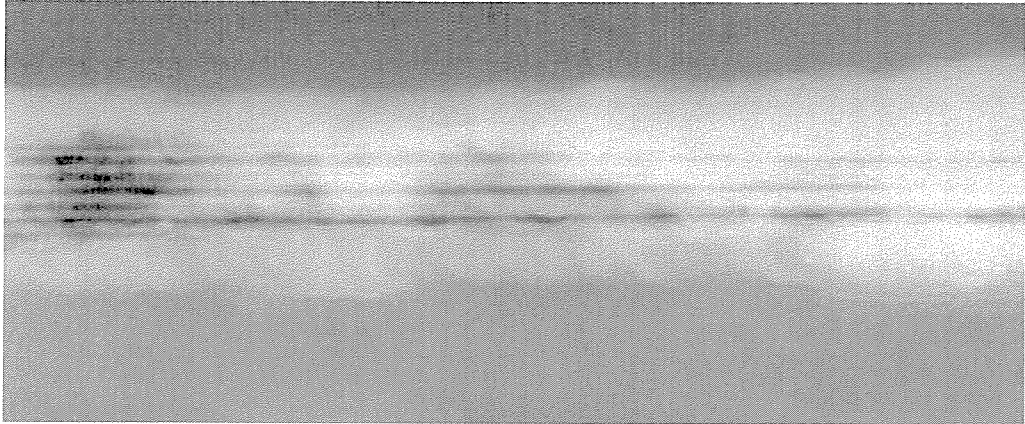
Slugging (weld rods placed in weld groove). (Courtesy Charles J. Hellier.)
